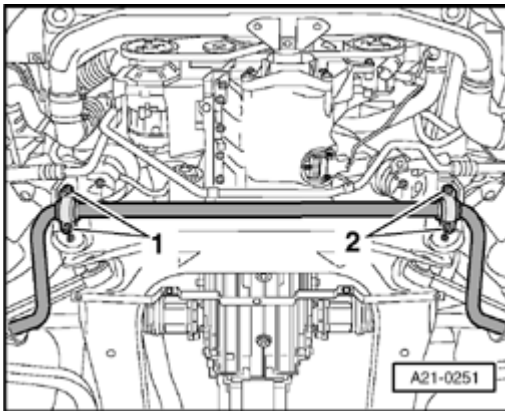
Removing Bolts For Left And Right Stabilizer Bar Mount
